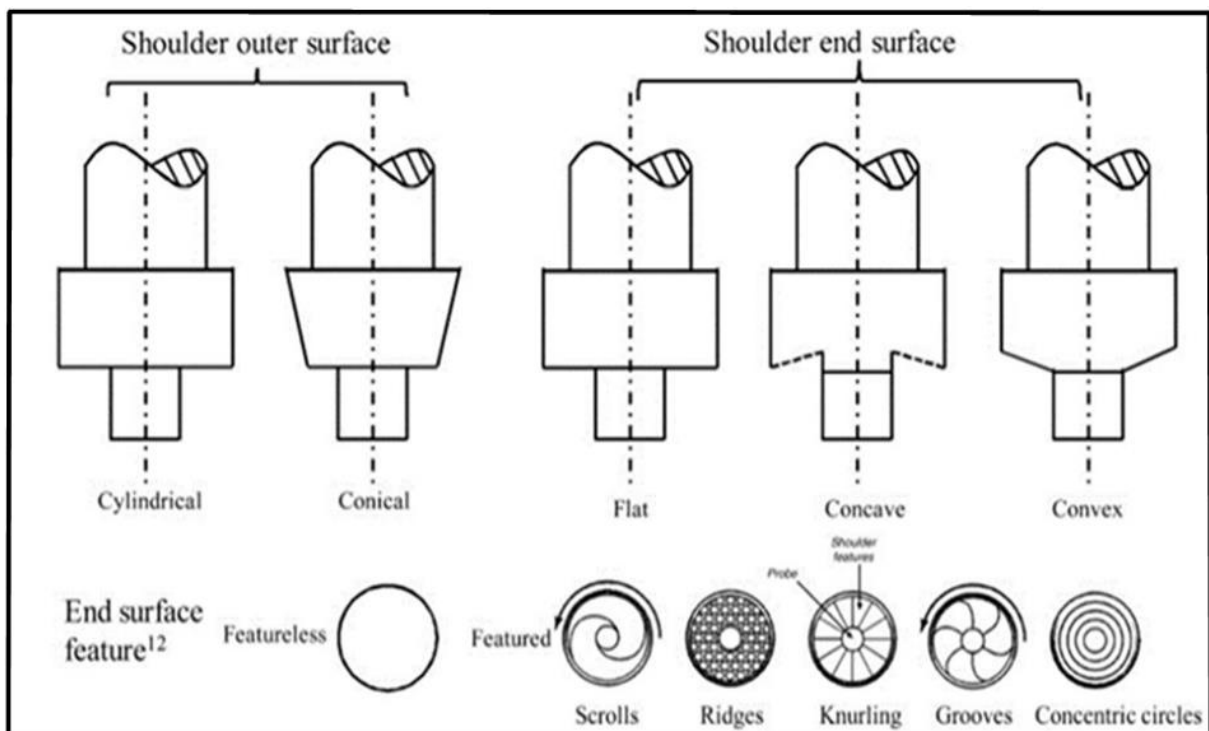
shoulder outer surfaces, the bottom end surfaces, and the end features [8].
